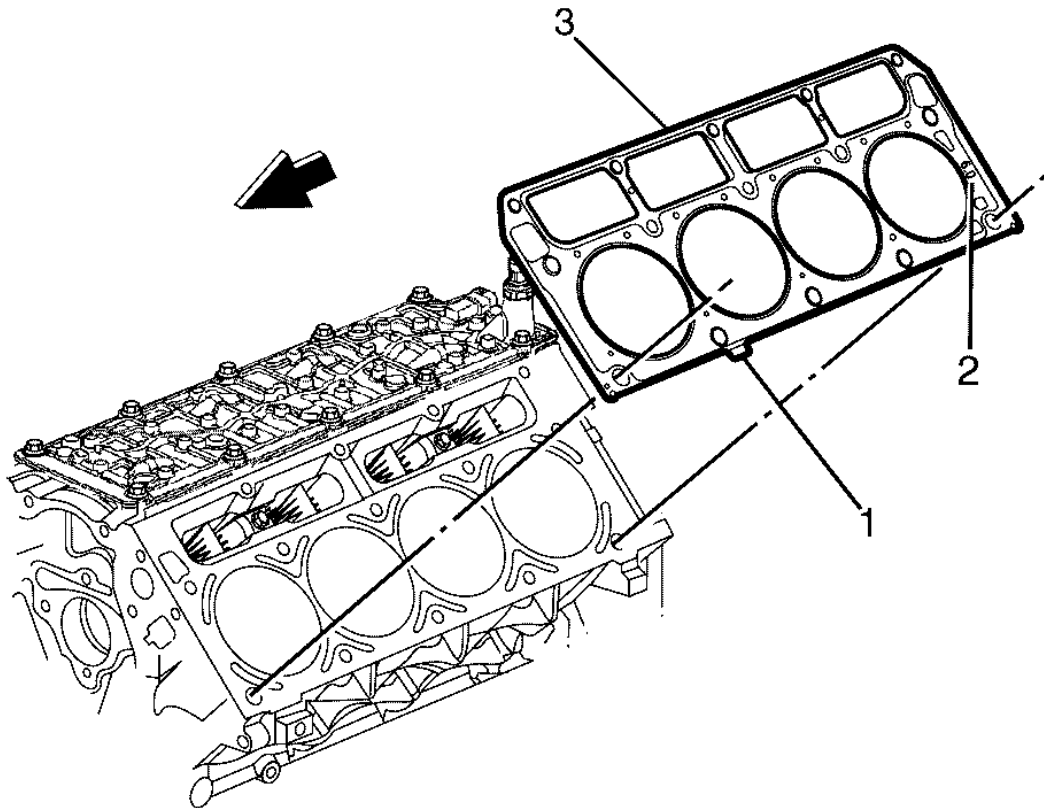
Identifying Cylinder Head Gasket (Left Side)
